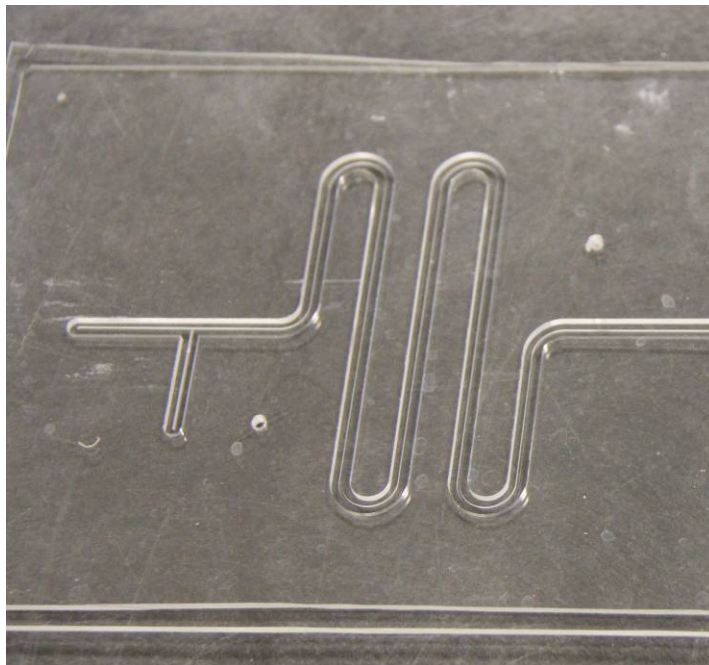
A milled PMMA with exposed channels' surface prior to Silica coating.
